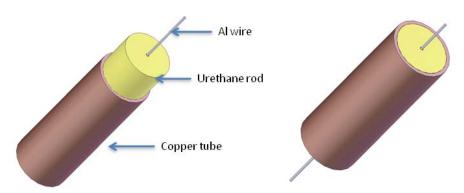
Assembly of aluminum wire, elastomer and copper tube.
